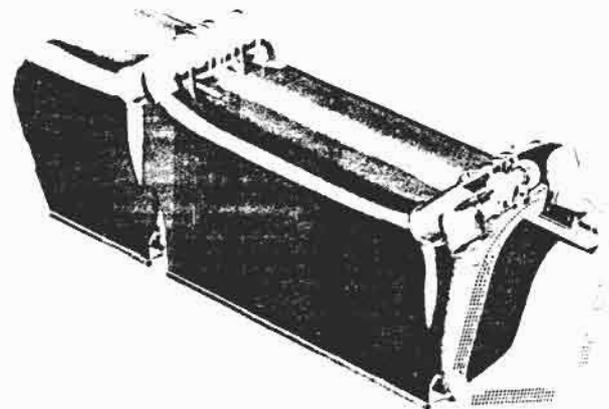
CUTAWAY VIEW SHOWING SPINE STRUCTURE, FLEXIBLE AIR BAG AND TURBO-GENERATOR
